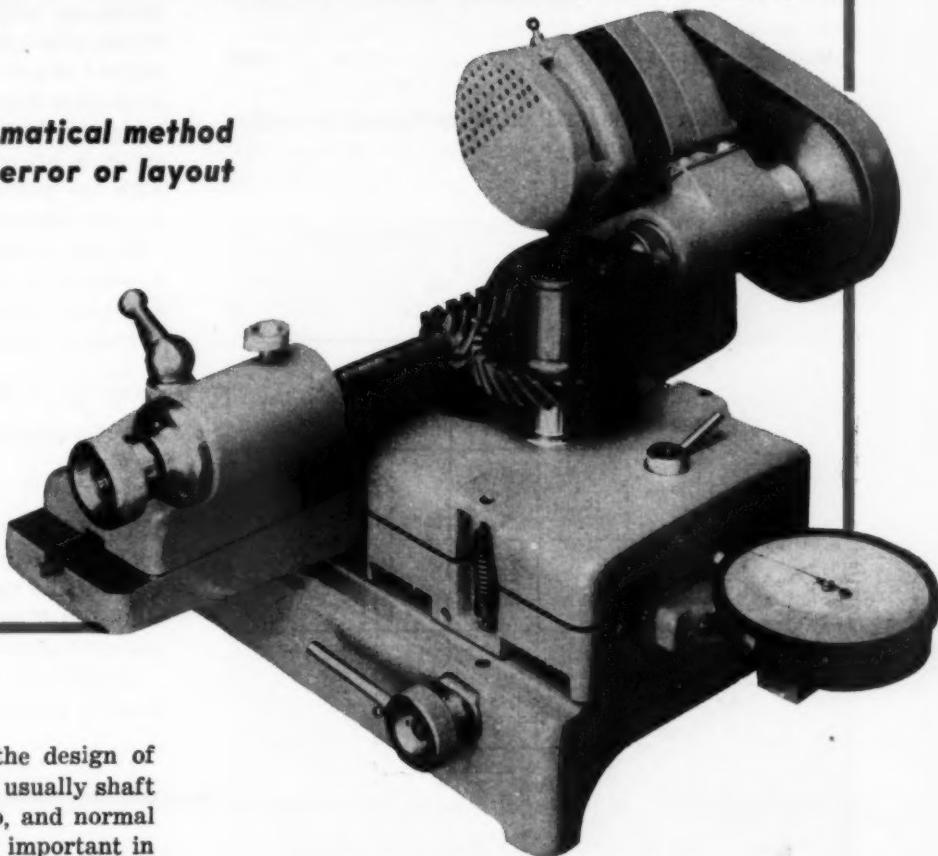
A pair of right-angle helical gears, shown being checked for runout in a worm-rolling fixture
